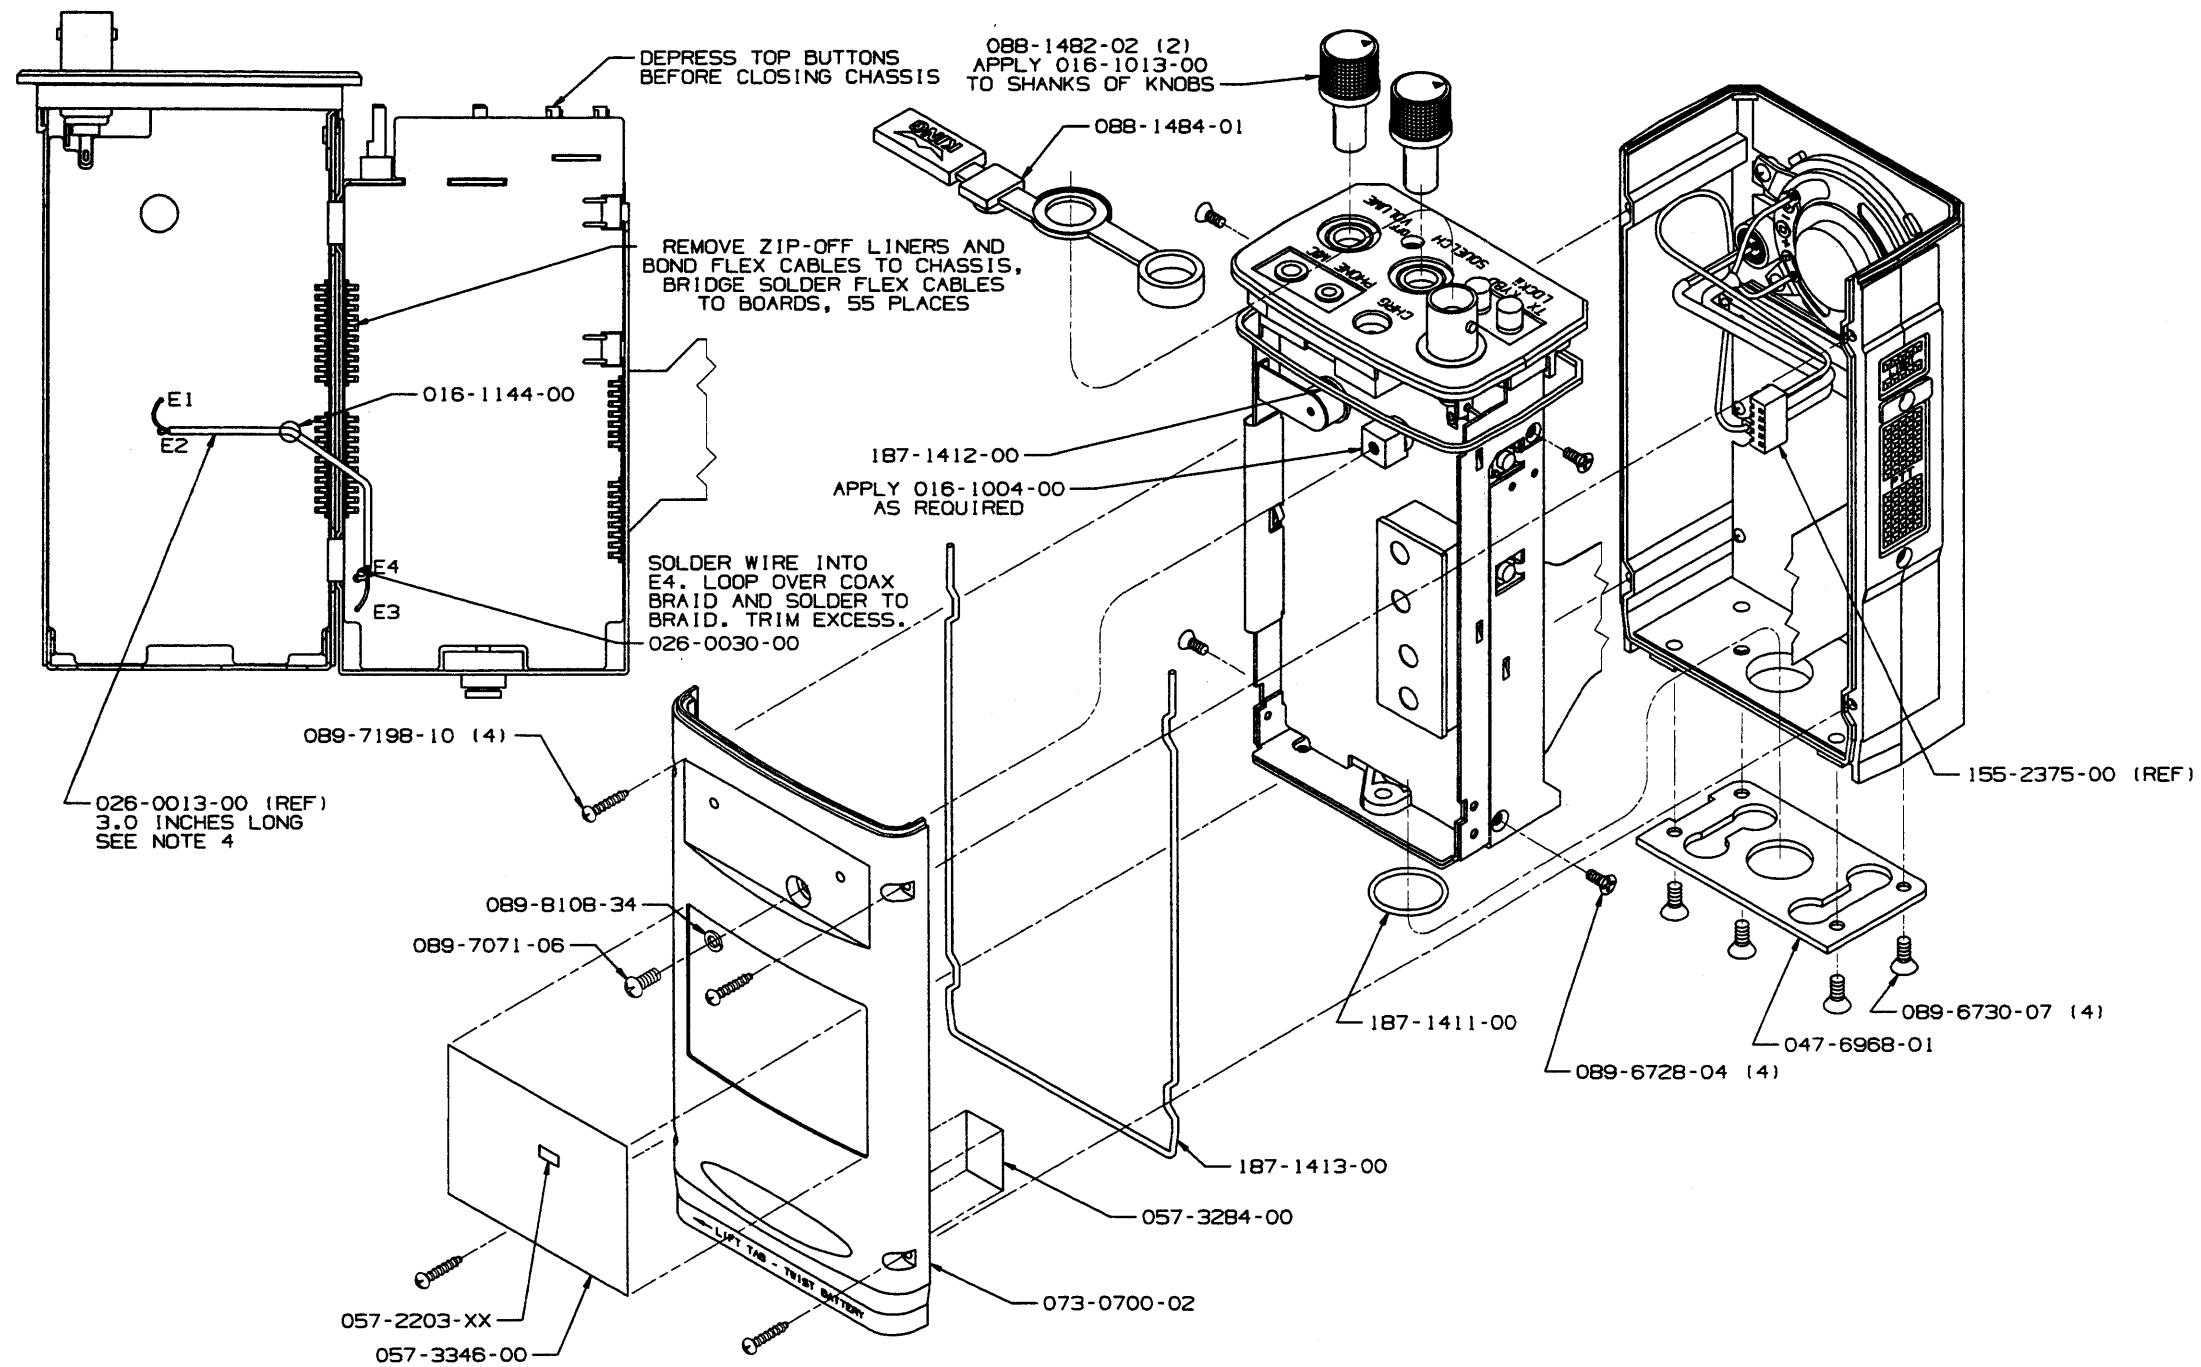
KX 99 FINAL ASSEMBLY
